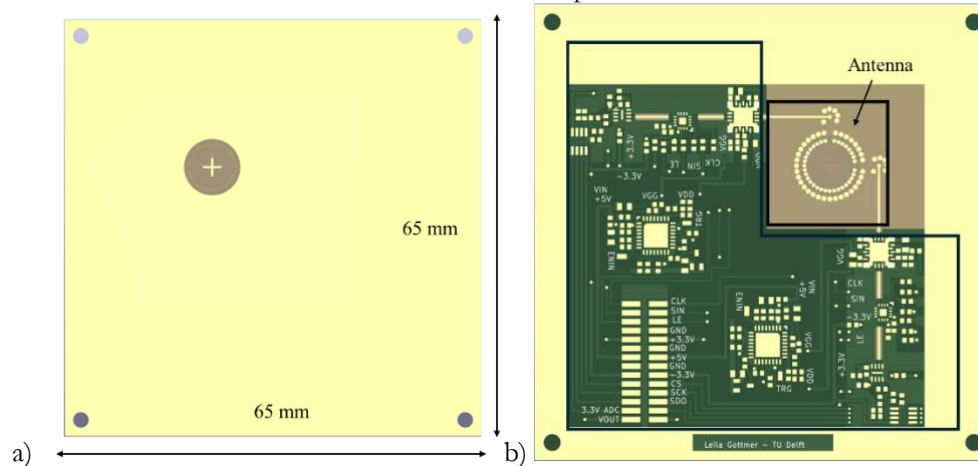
PCB board of the FR2 sensor integrating the lens antenna and the HR detector, a) front side (radiating/receiving side), b) electronic components and interface side.
